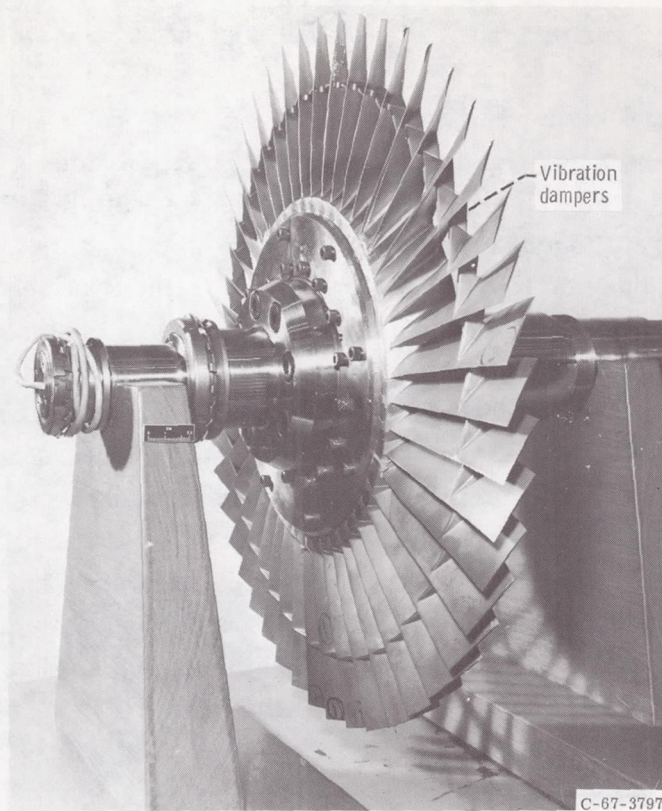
20-Inch (50.8-cm) axial-flow compressor rotor.
